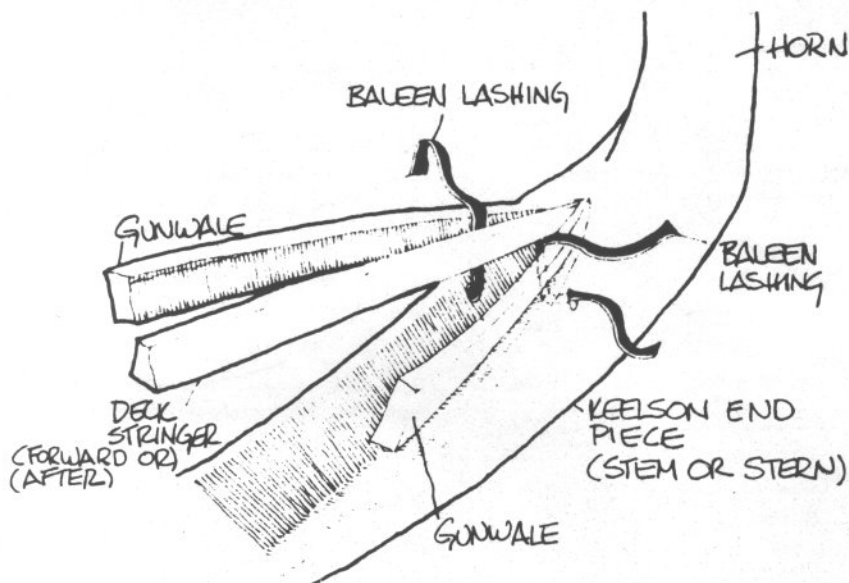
FITTING AND LASHING GUNWALES AND DECK STRINGER TO KEEL END PIECE.
